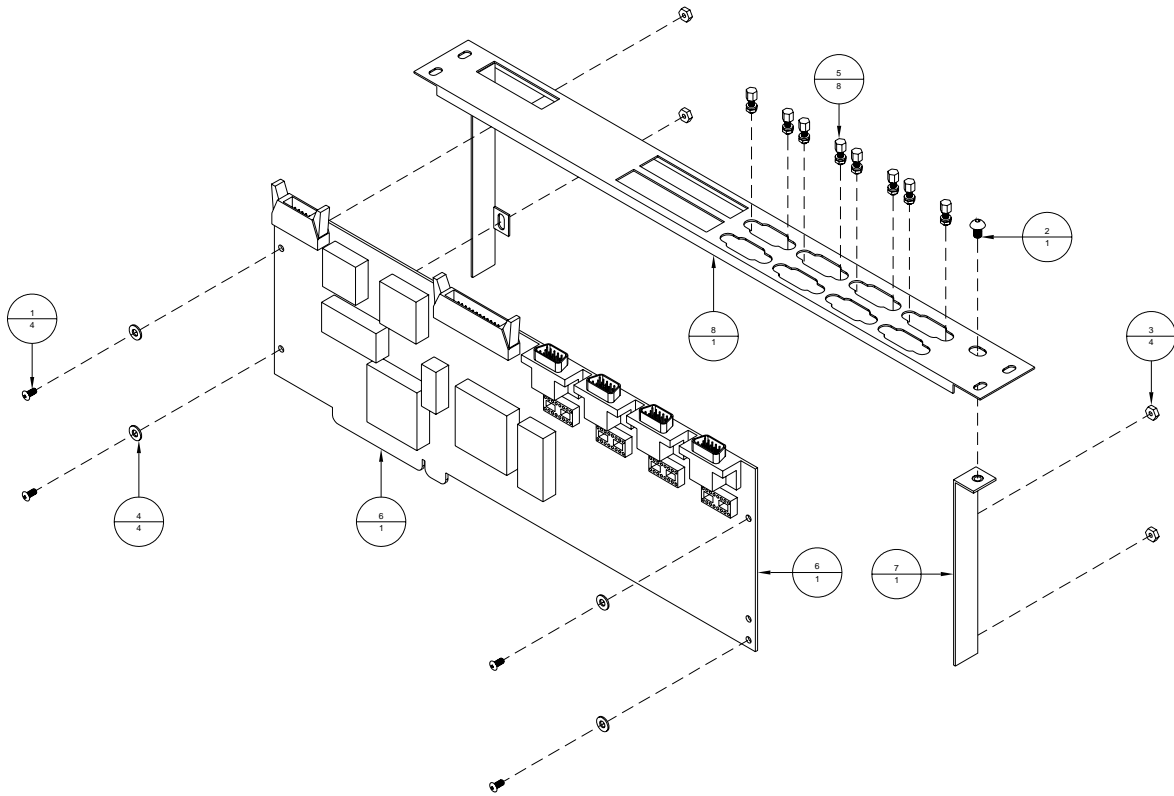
Datapath Card Assembly, BK1700 (9102780A)
